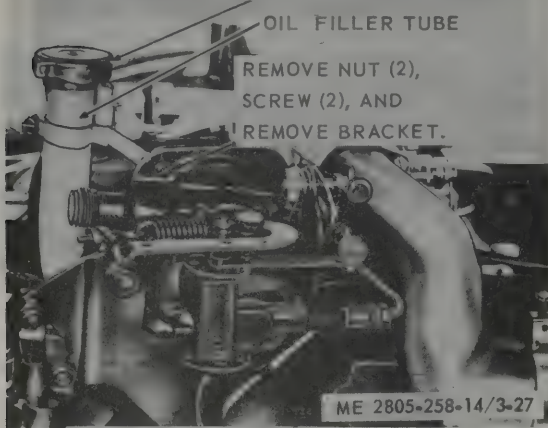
Oil gage rod, and oil filler tube, removal and installation.
